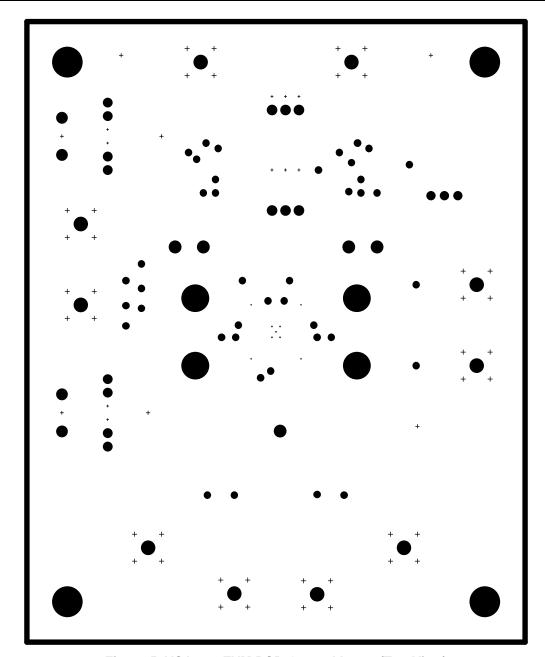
VCA2617EVM PCB Ground Layer (Top View)
